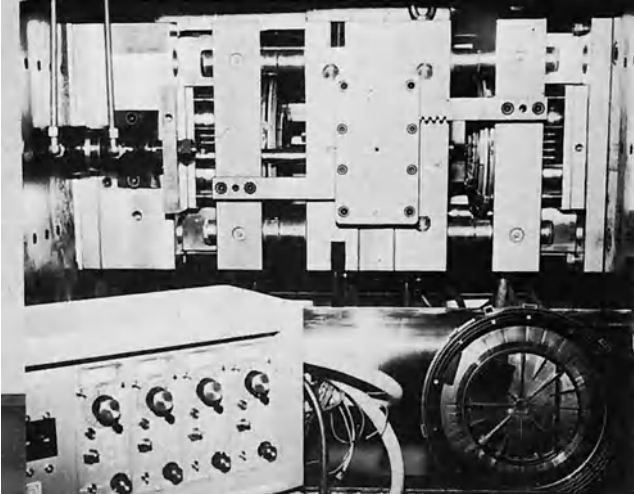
Stack mold with racks for synchronous opening of the two parting planes
